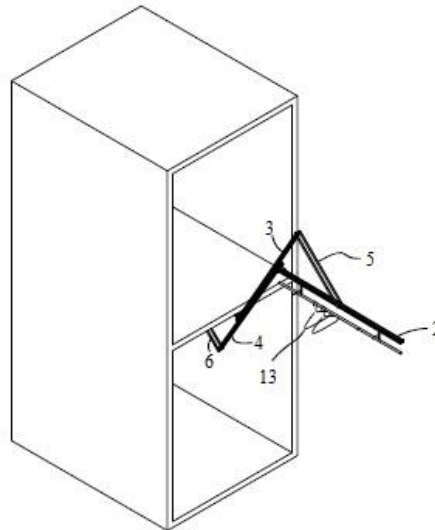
The LLD utilized as a pop-up coat hanger rod [3].
